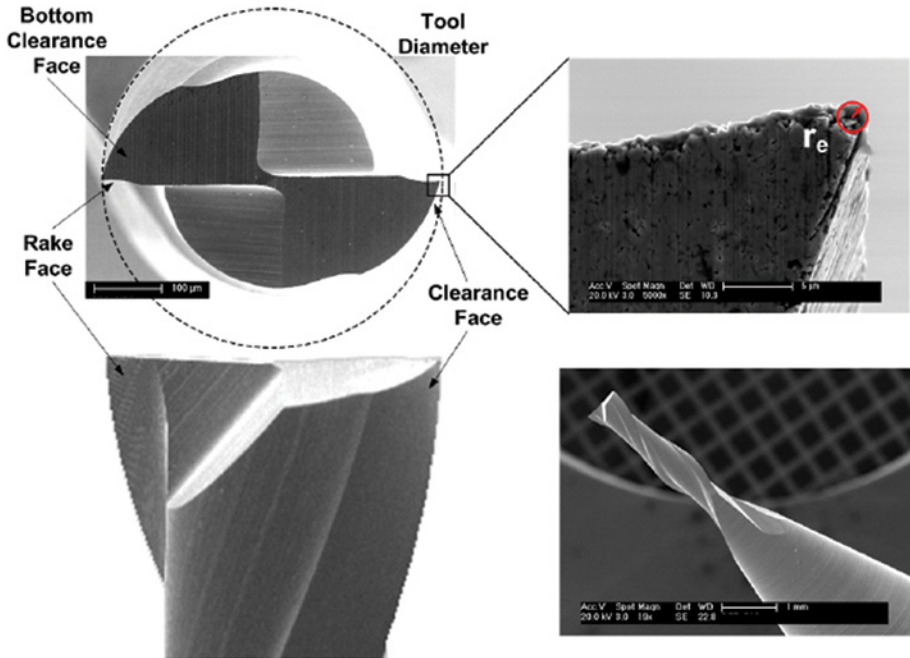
Geometry of new micro flat end mill (500 μm in diameter)
